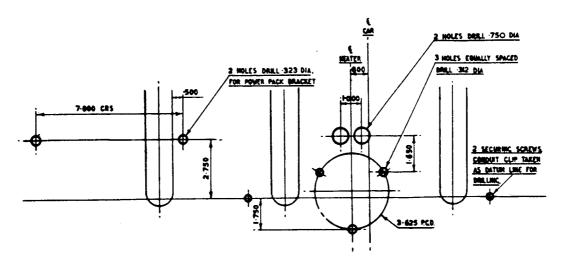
CHASSIS NOS. B.2.AK - B.271.EW - RIGHT-HAND DRIVE.
